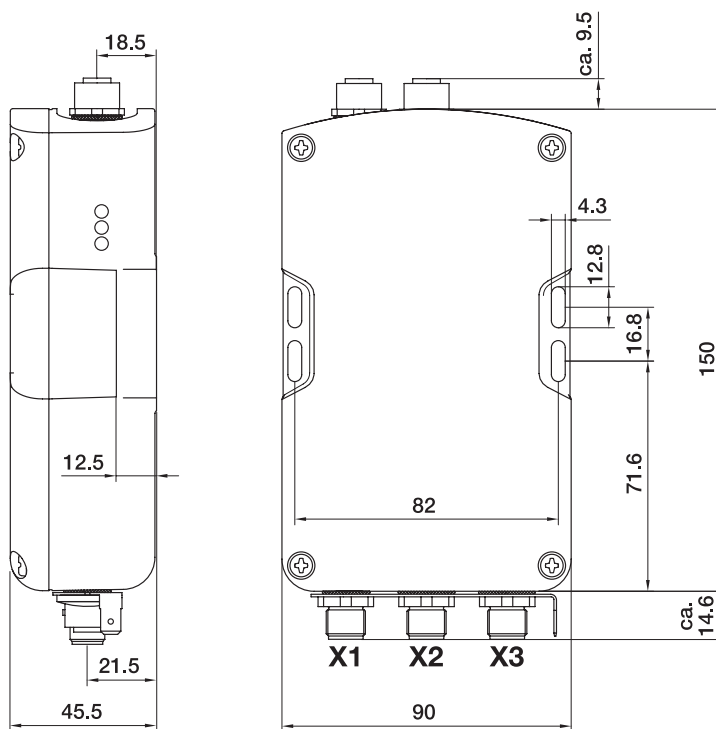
Mechanical connection BIS M-6000-007-050-00-ST24 (dimensions in mm)
